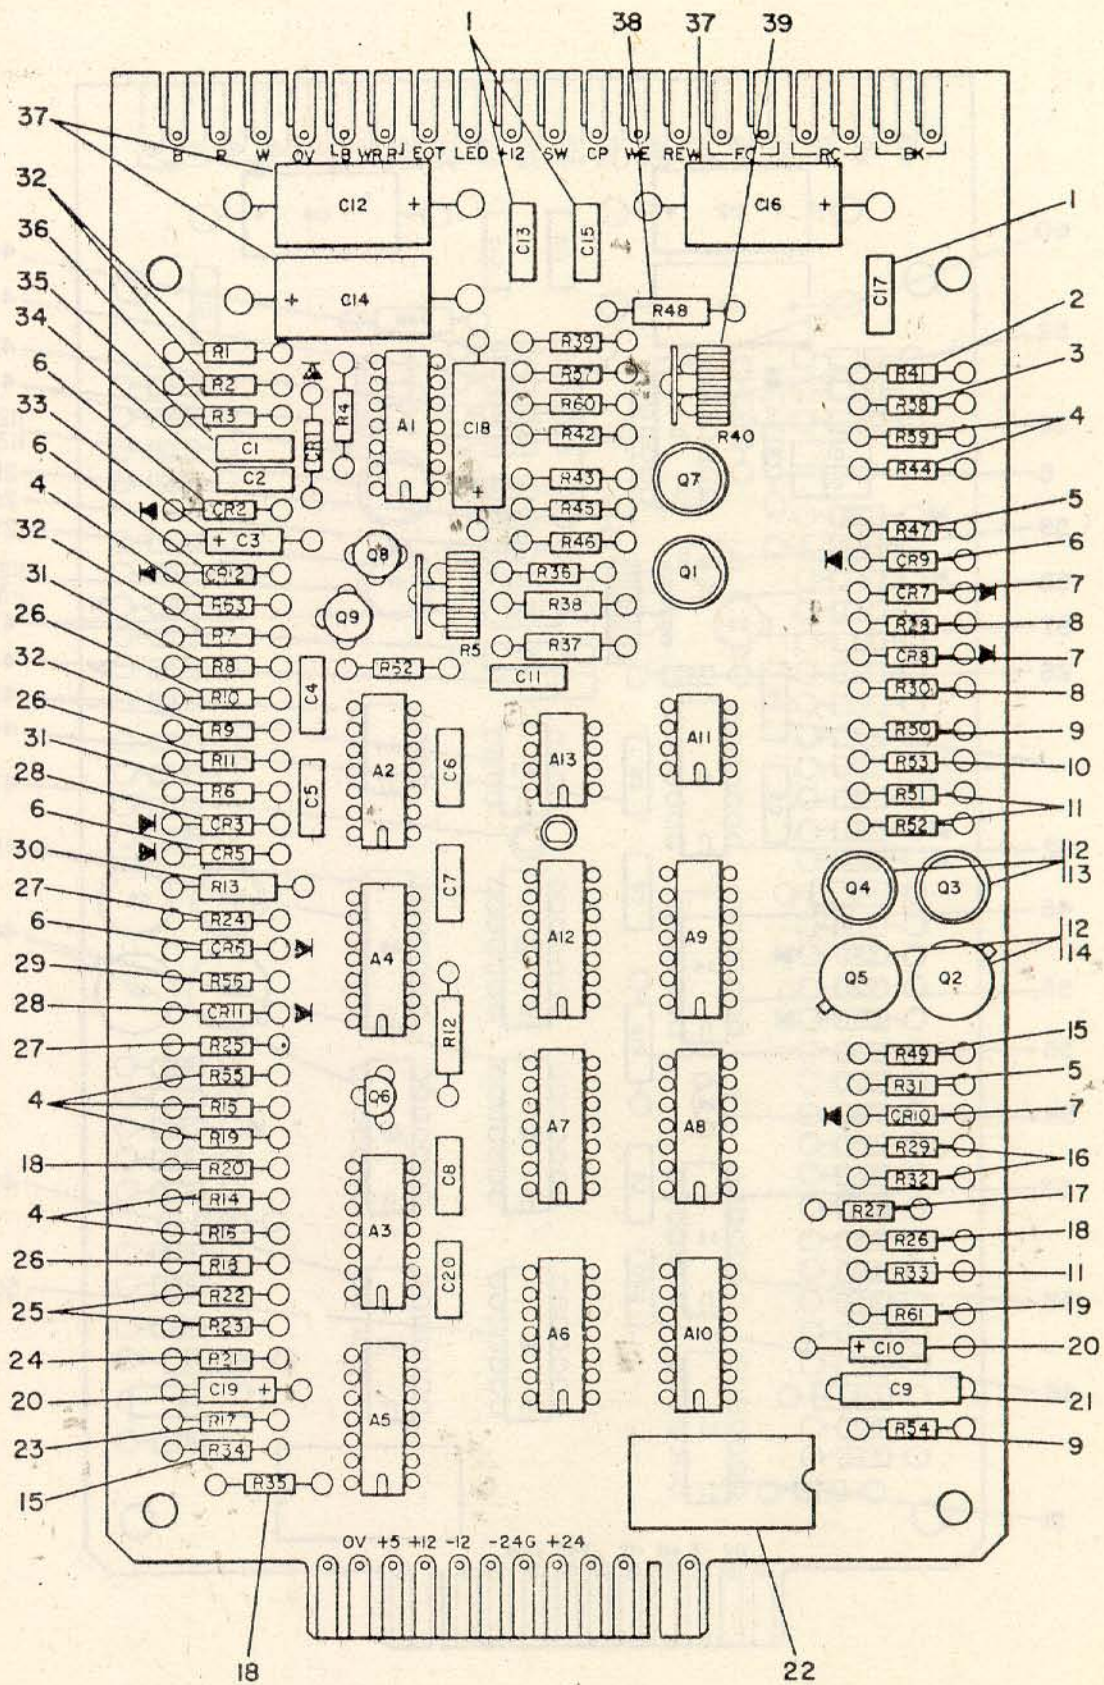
Tape Local Electronic, PC Card (Sheet 1 of 2)
